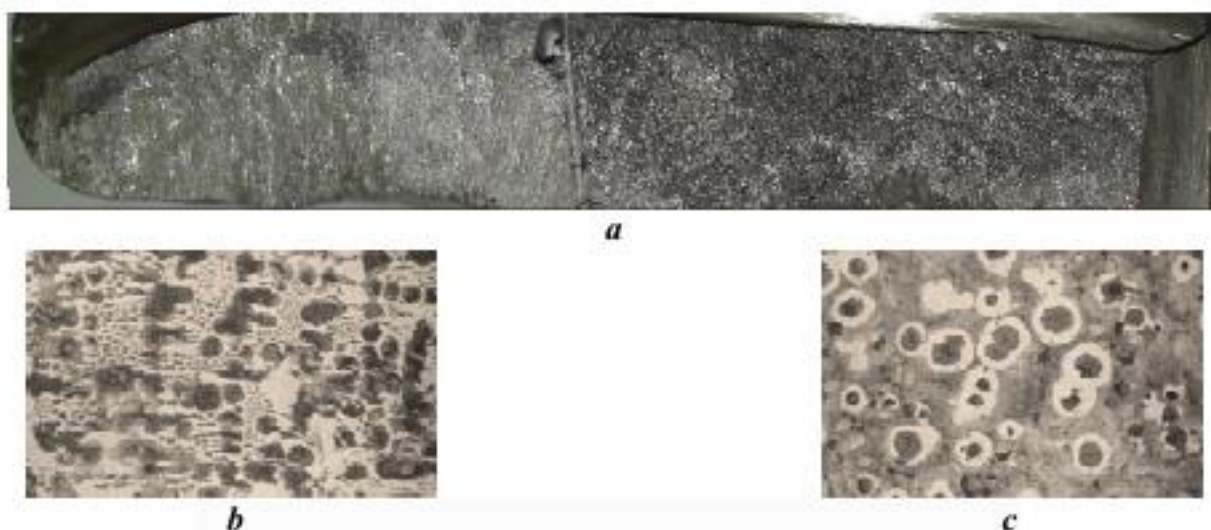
Fracture (a) and microstructure of the left (b) and right (c) parts of double-sided casting
